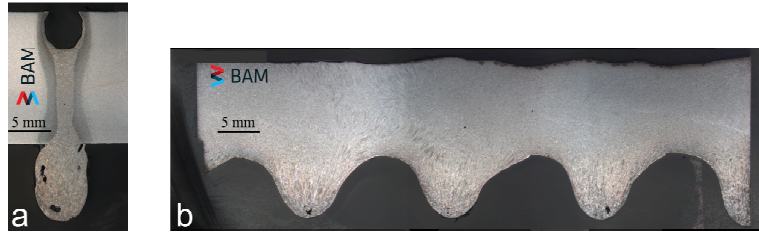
Reference full penetration weld in PA position of 15 mm mild steel S235JR with IPG fiber laser using 9.2 kW laser beam power at a welding velocity of 0.5 m min⁻¹, (a) Cross-section; (b) Longitudinal section.
